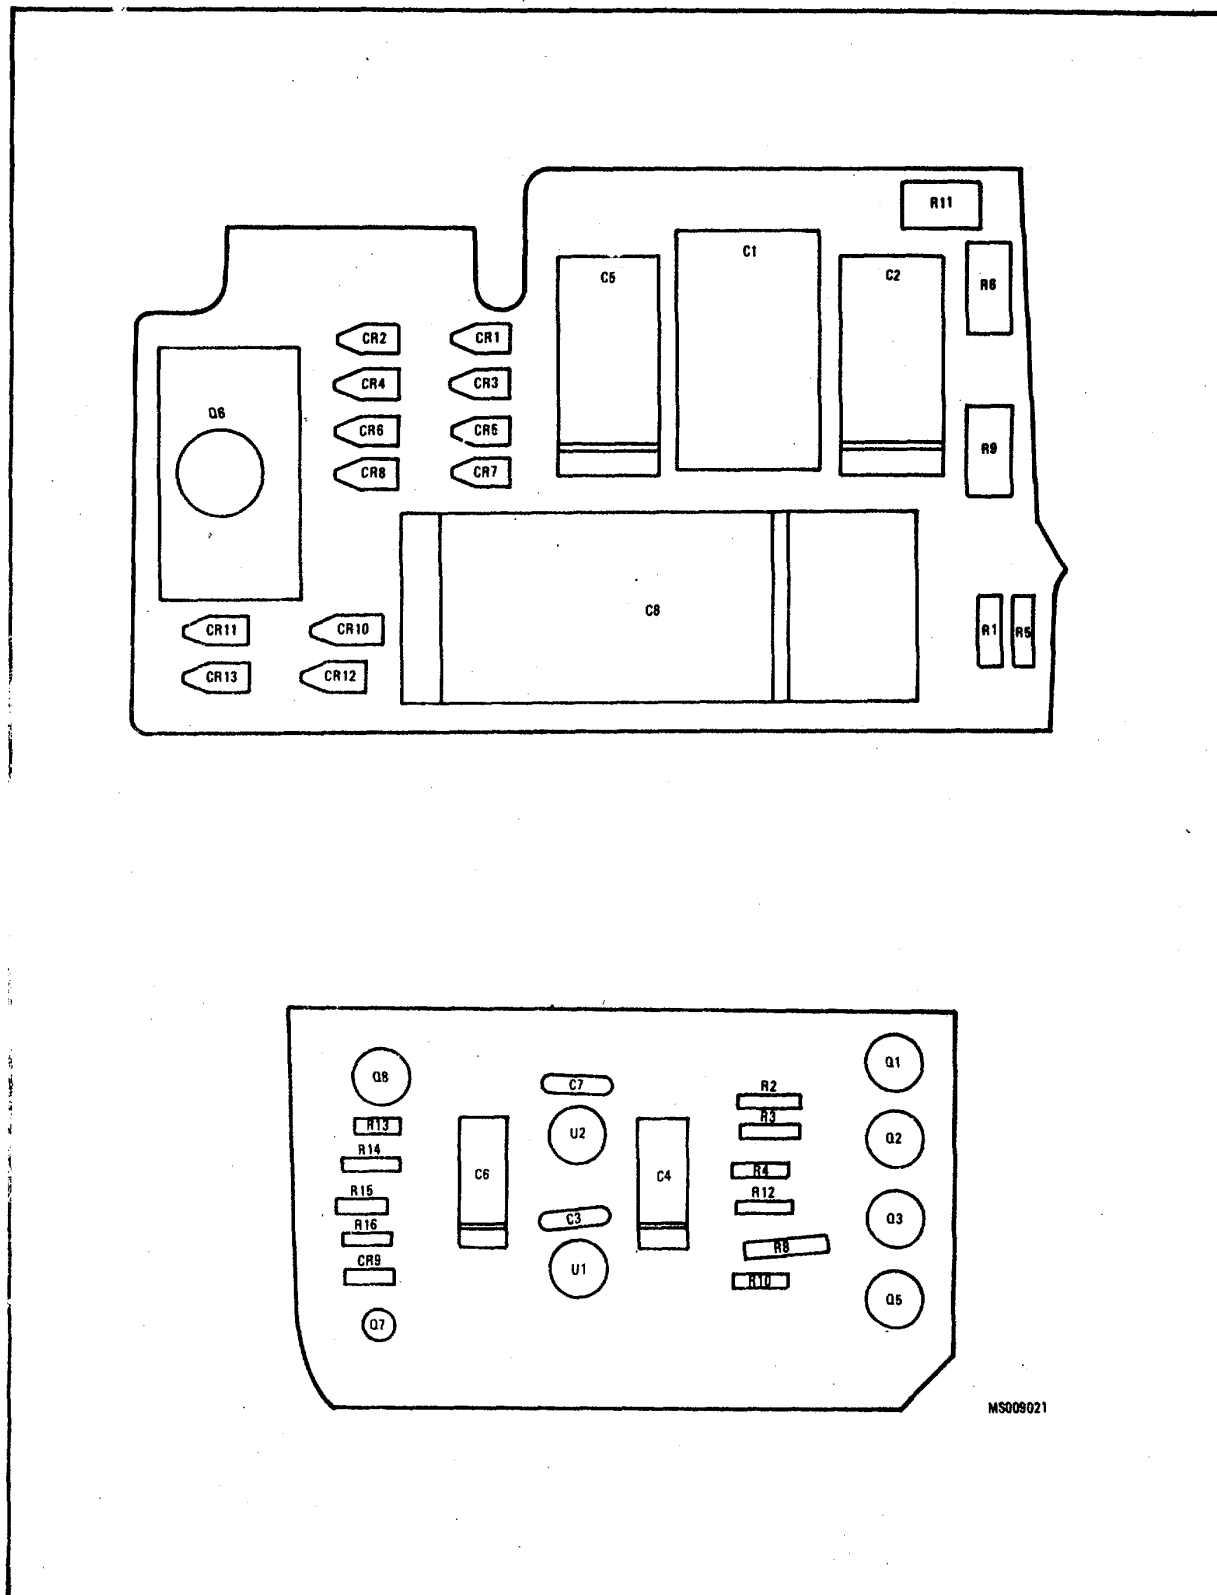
POWER SUPPLY PCB ASSEMBLY
